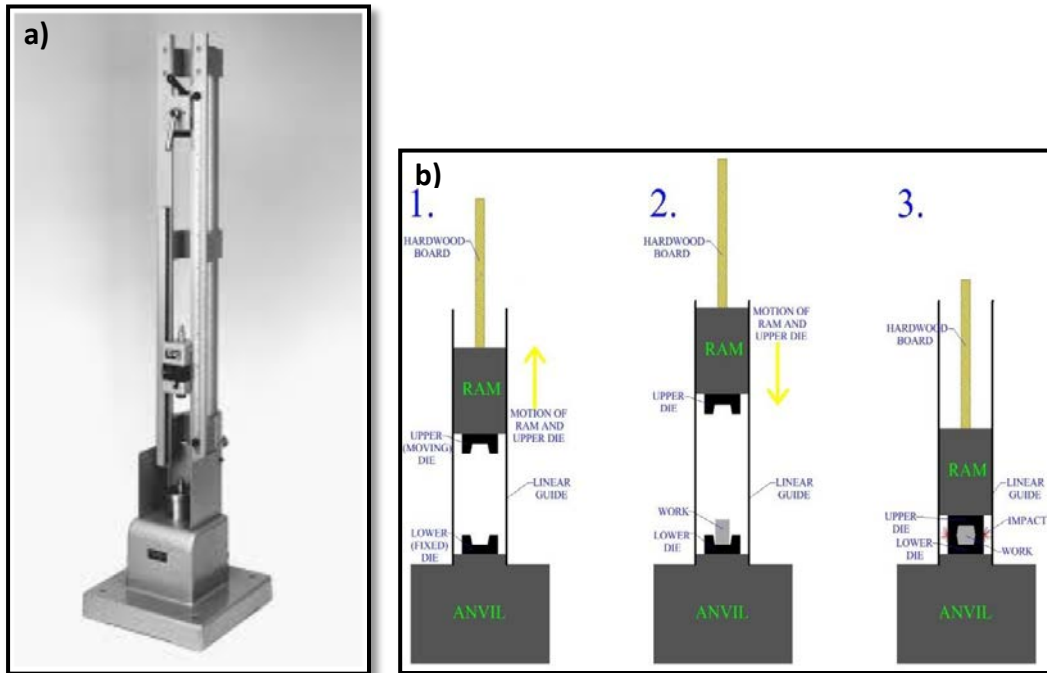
Drop hammer machine, a) Machine [82] and b) How the machine works [83]
